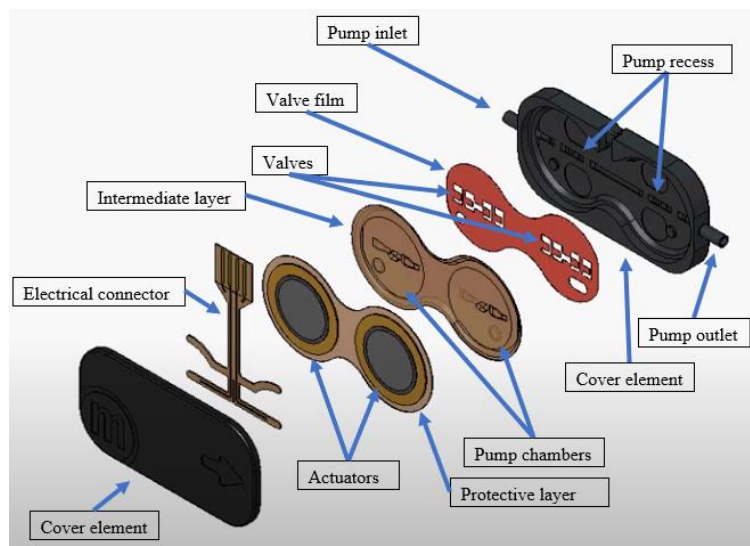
Exploded view of Bartels Mikrotechnik micropump [24].
